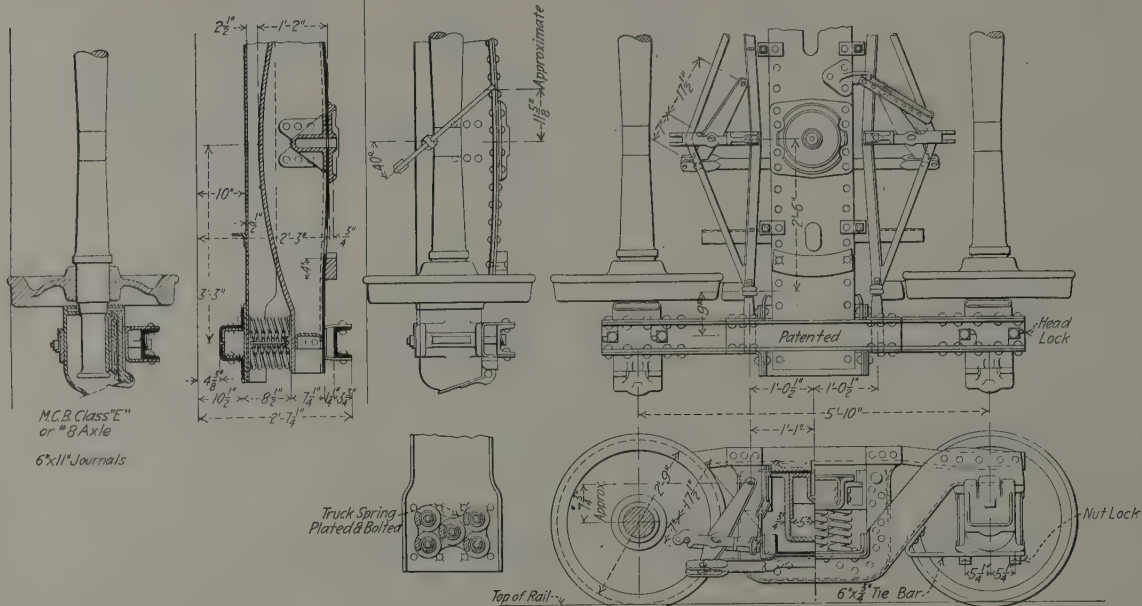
General Drawing of Slick Side Frame Truck. Cambria Steel Company.
